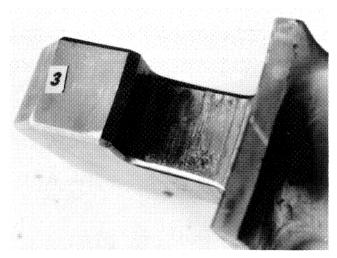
View of a First Stage Blade Root Showing Fretting Corrosion.
